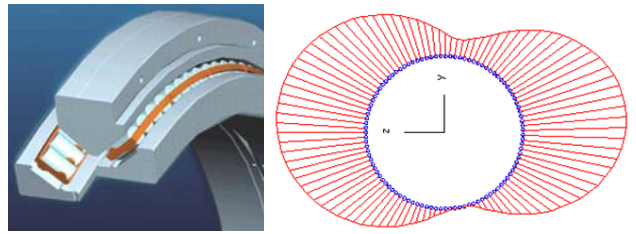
Left: SKF Nautilus bearing [11]. Right: KISSsoft analysis assuming rigid bearings [12]
